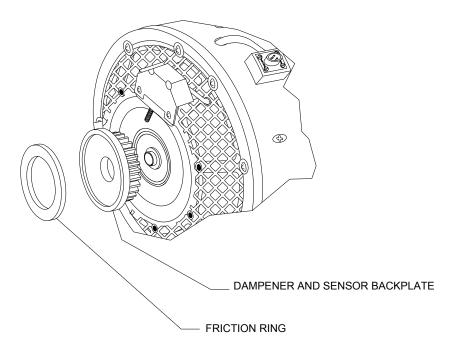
Installing Dampener or Dampener and Gear Backplate and Friction Ring
